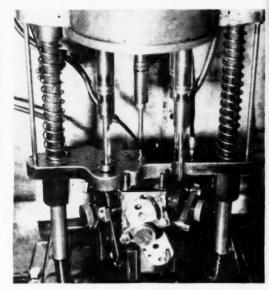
A view of an ingenious drilling jig and holding fixture in which plates are accurately positioned for drilling viscose passages.
